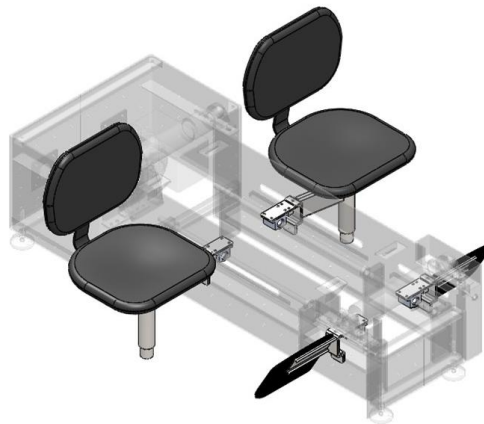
Highlighted Seating and Footrest Cantilever Arms Mounted to Linear Bearing and Rack/Pinion Adjustability System
